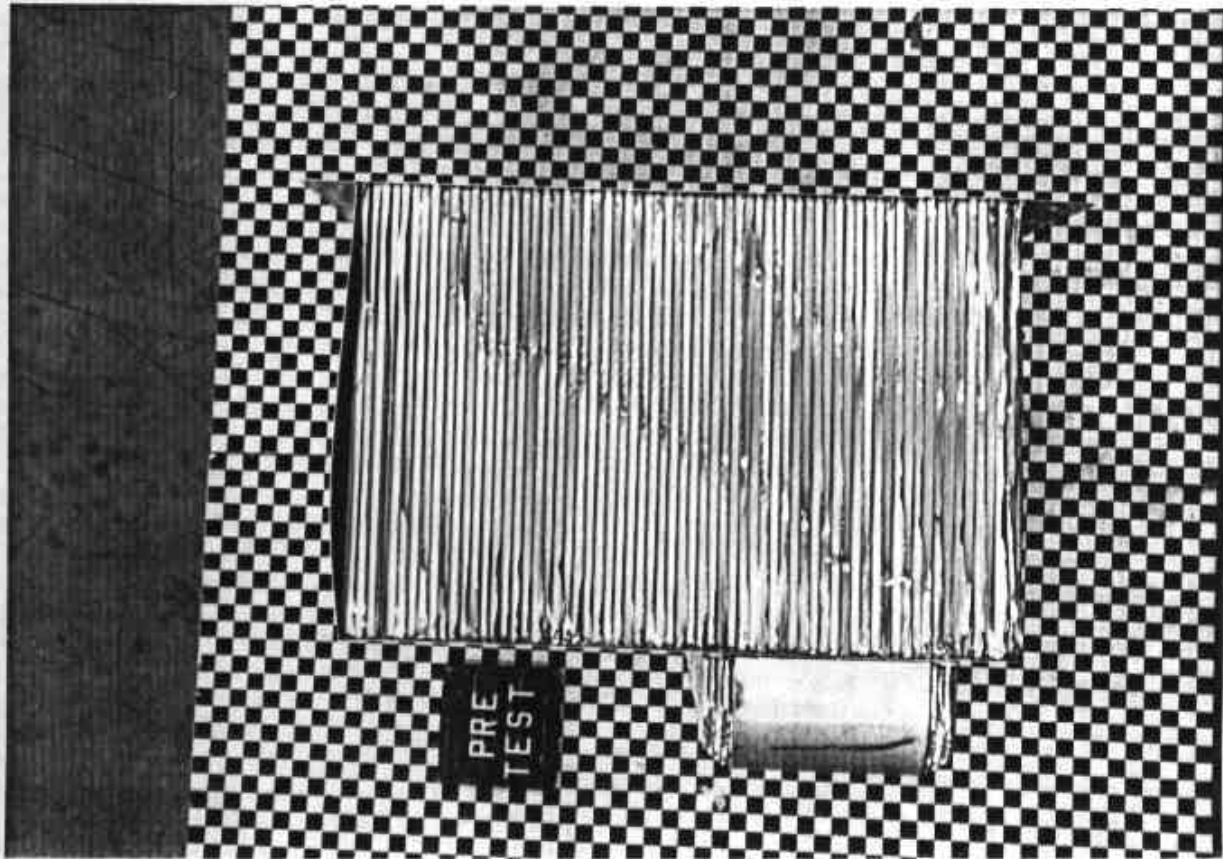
PRE-TEST MDB FACE - VIEW 2
